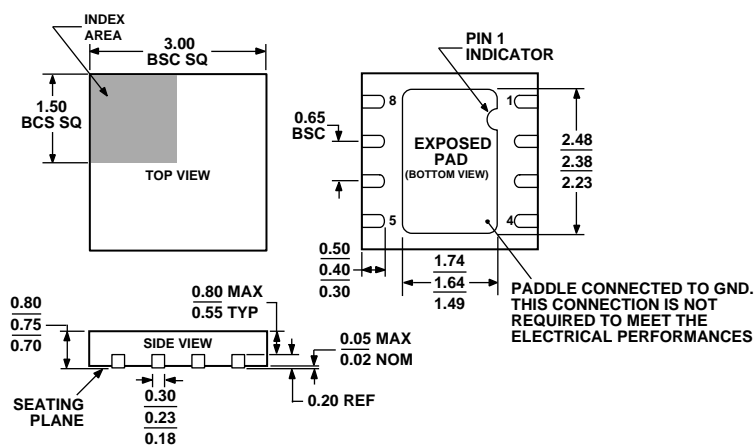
8-Terminal Quad Flat No Lead Package [QFN (LFCSP)]
